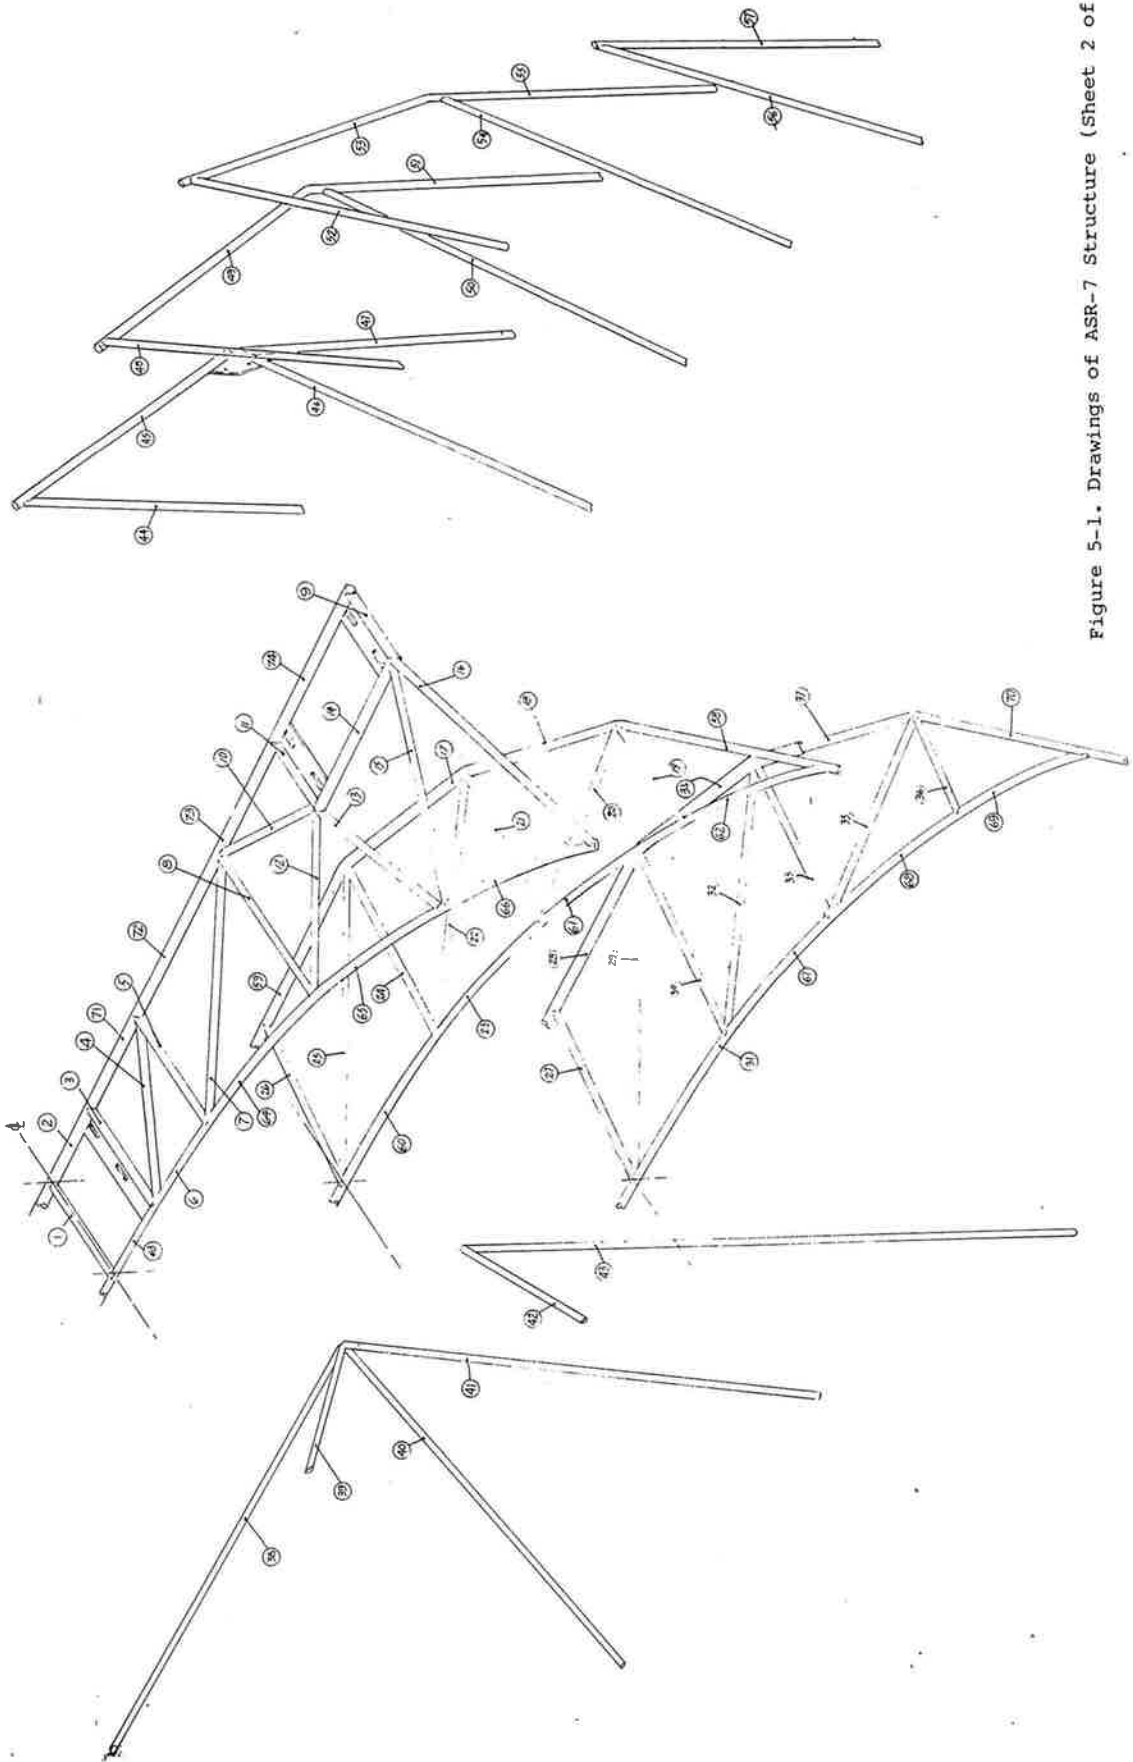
Drawings of ASR-7 Structure (Sheet 2 of 3)
